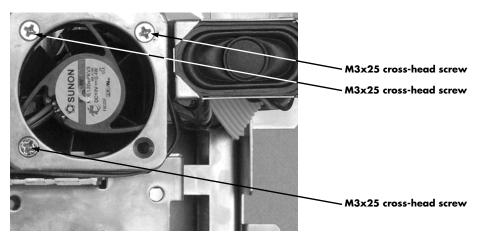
Remove Three (3) M3x25 cross-head screws.
